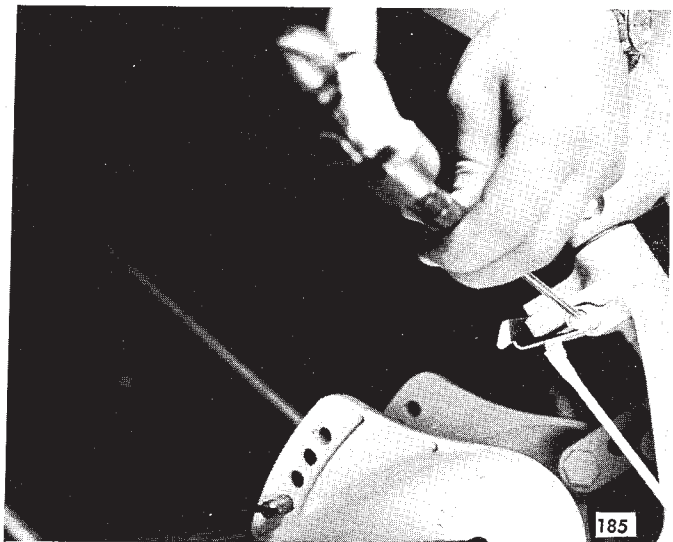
REMOVING REVERSE LOCK GROOVE PIN
